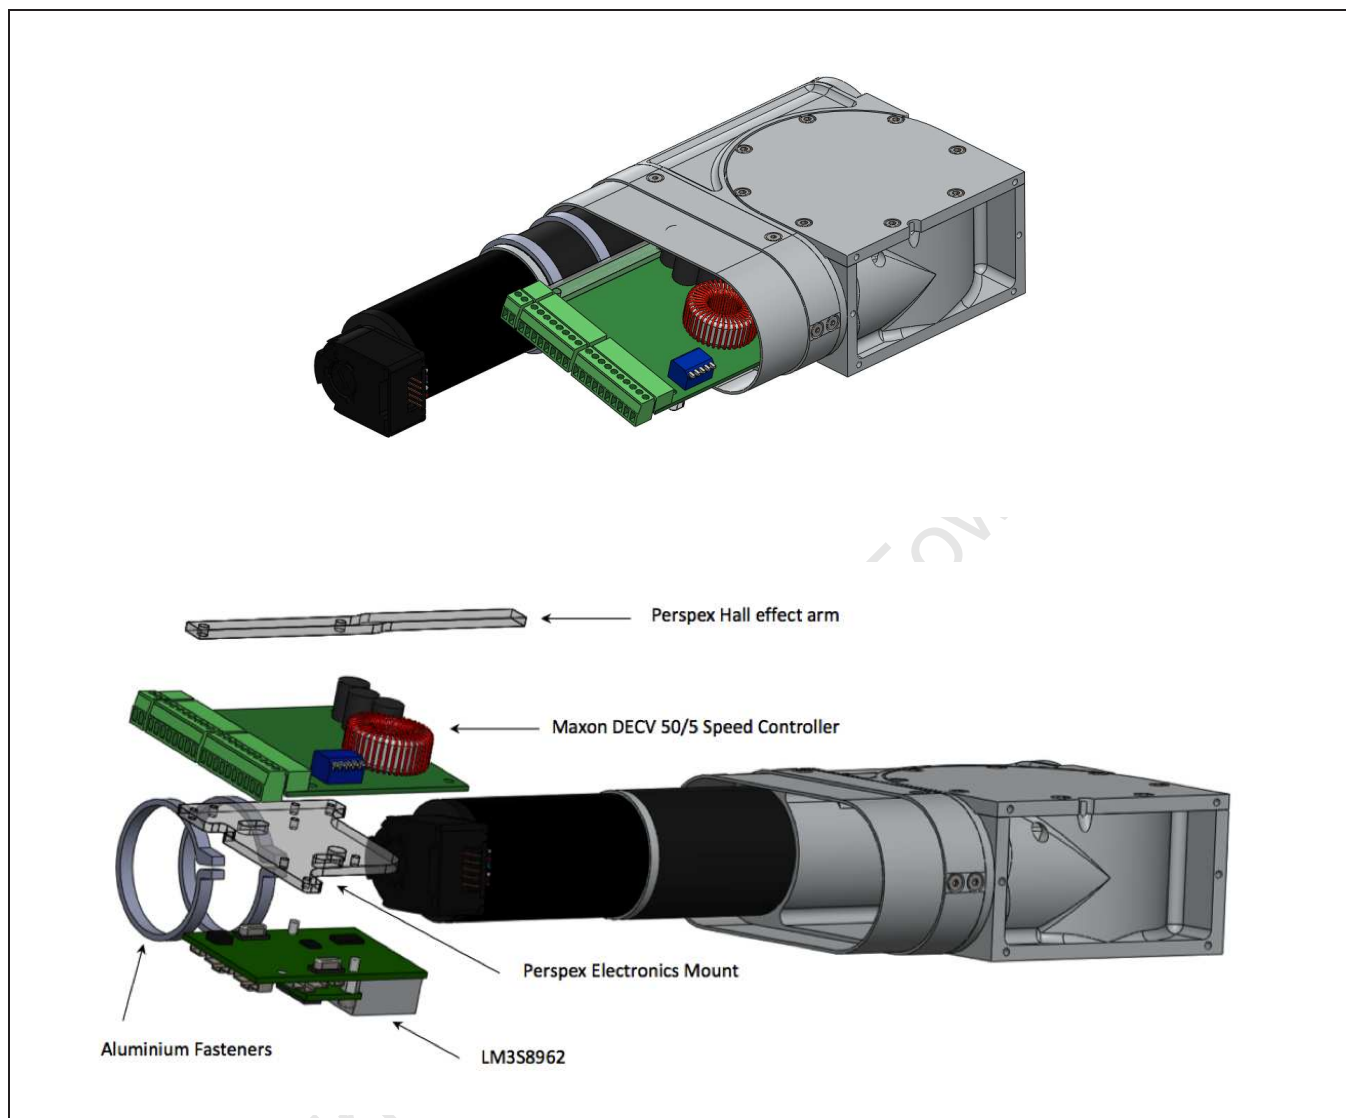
Electronics assembly for motors 1, 2 and 3.
